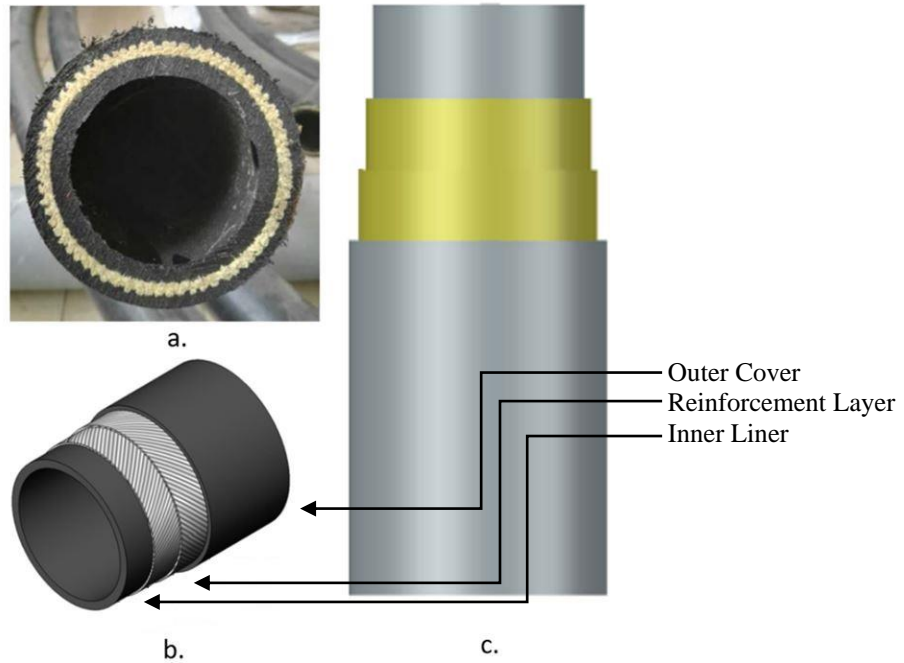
RTP configuration (a) cross-section of RTP; (b) isometric view of RTP; (c) side view of RTP.
